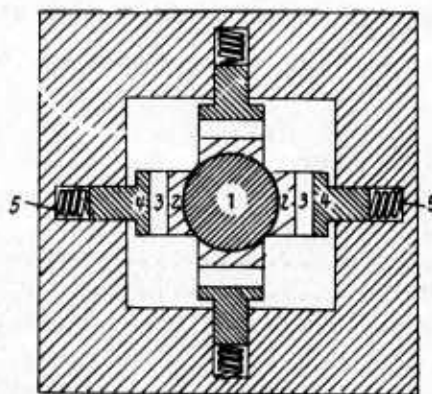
Schematic drawing of the modified model of the piezoelectric accelerometer [39]
